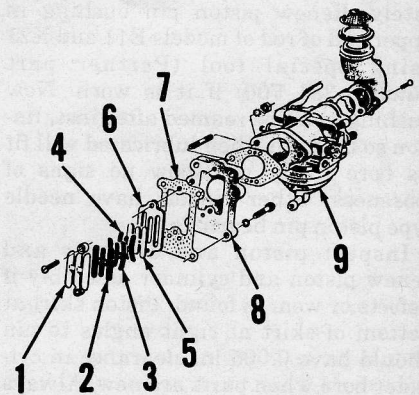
View of induction system used on models R11, X21, R12 and P15. Valve springs (3 & 4) are bowed and must be assembled so that the center of the springs are together and the ends are apart.
